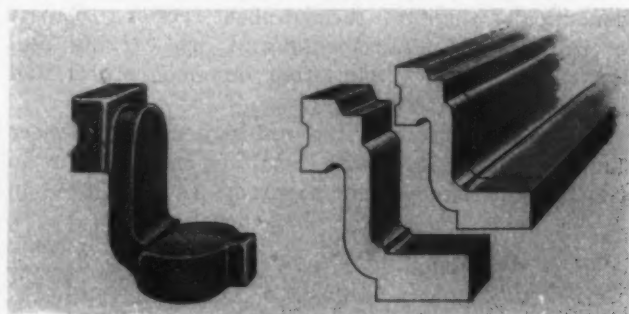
Small forgings, castings or parts machined from bar stock, left, may permit redesign to an extruded shape, right, if cross section is symmetrical along one axis
